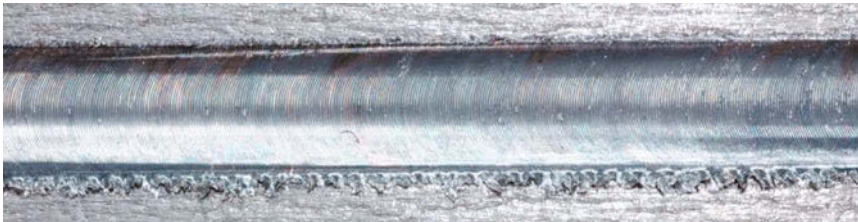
Weld appearance of a FSW on ultrahigh carbon steel (2mm probe length).
